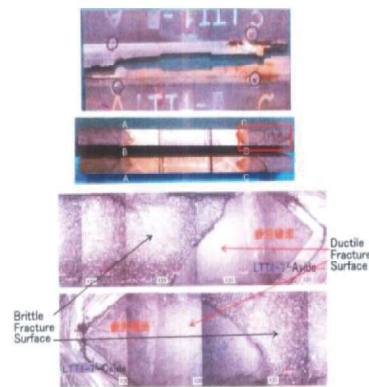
Fracture surface and pass after fracture toughness test [LTT1, -139°C , $K_{Ic} : 3.45 \times 10^3 \text{ N}/\text{mm}^{3/2}$]
